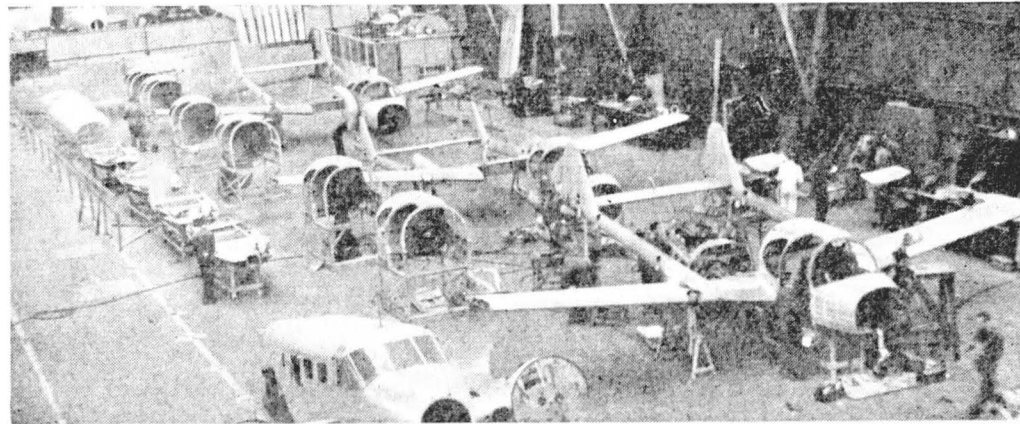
The fuselage assembly line and part of the final assembly line for the Promotor. The power plant, in this case with the cowling panels removed, is about to be mounted on the machine in the foreground
